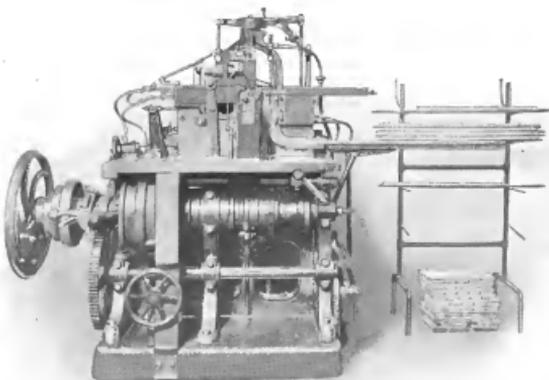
Automatic typesetting machine; American Type Founders Co.
